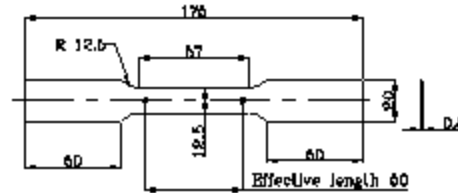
Monotonic test specimen drawing (ASTM E 8/E 8M - 08)
